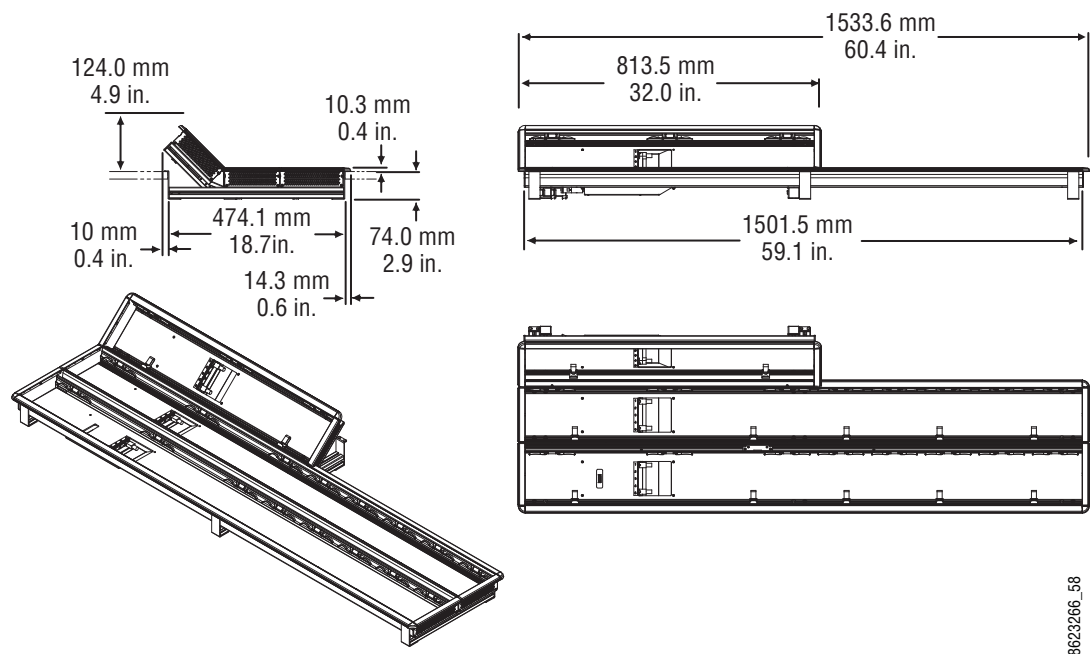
2-ME Control Panel Cutout Dimensions, Flat Installation
